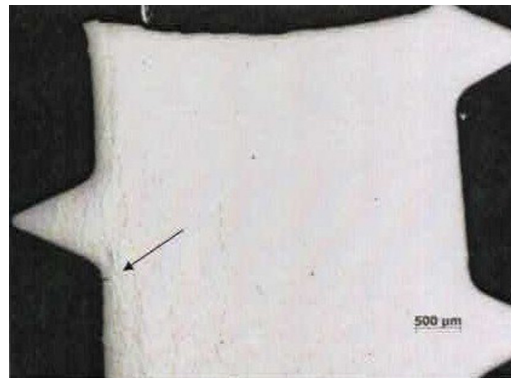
Metallography. Section normal to fracture. Noticeable is a crack at the root of a thread (arrow) [26].
